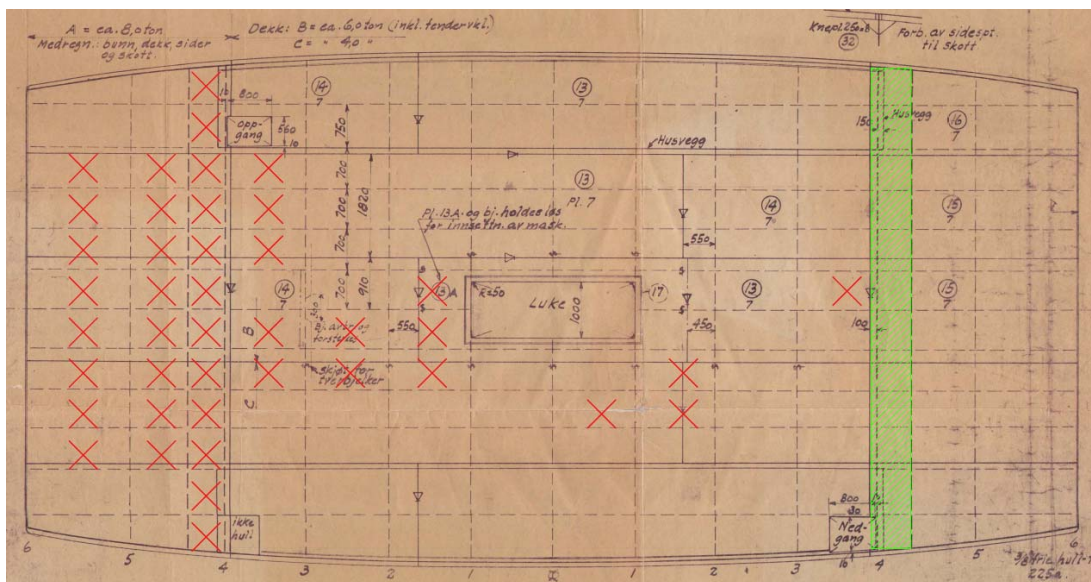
Overview of cut outs in original deck plating (Red) and replaced original deck plating (green)
